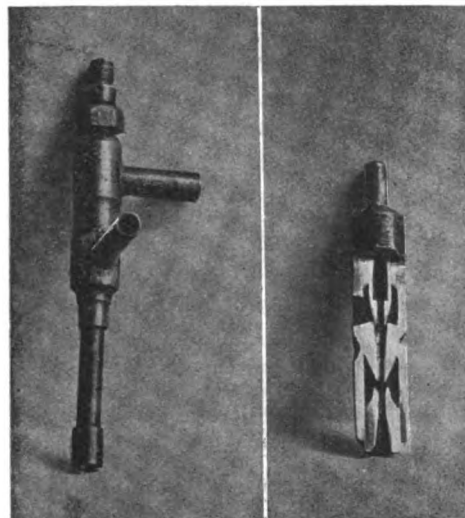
SHOWING METHOD OF REGULATING BOILER FEED PUMP.
